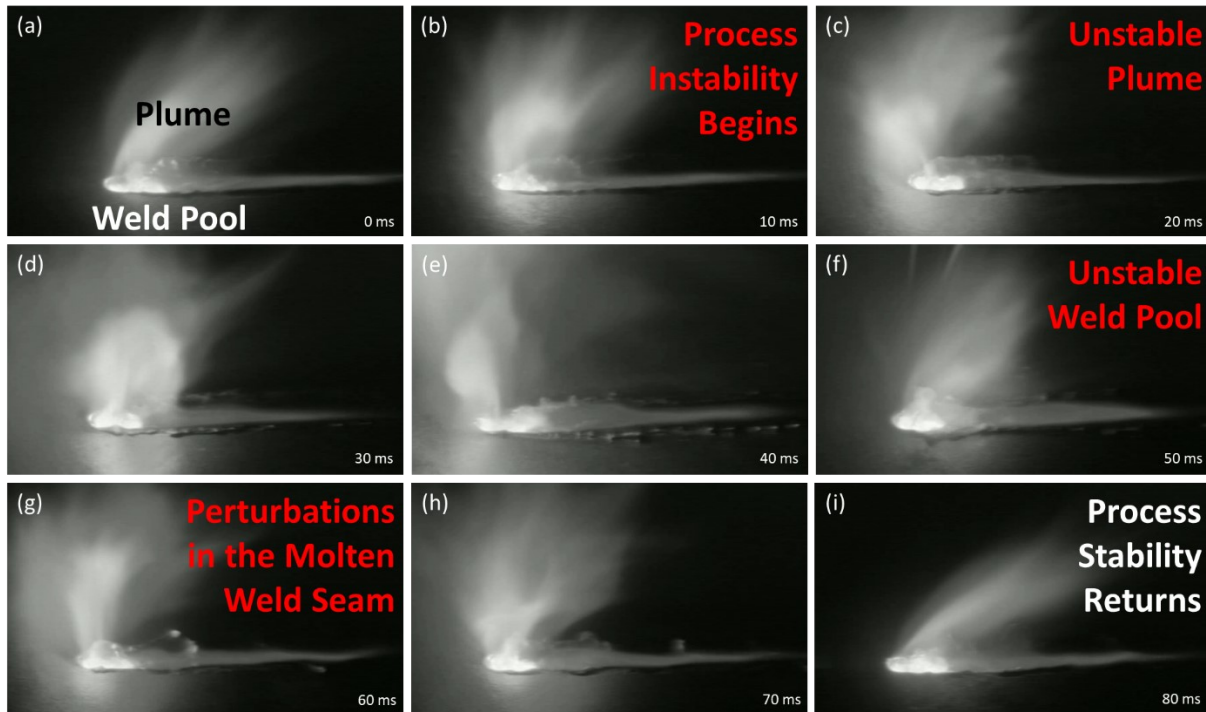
Still images of the weld zone using the focused beam condition showing a larger, unstable melt pool, some spattering, instability in the weld plume and perturbations in the weld seam. The size of the plasma plume at the top surface is noticeably smaller as some of the plasma escapes through the bottom of the keyhole.
